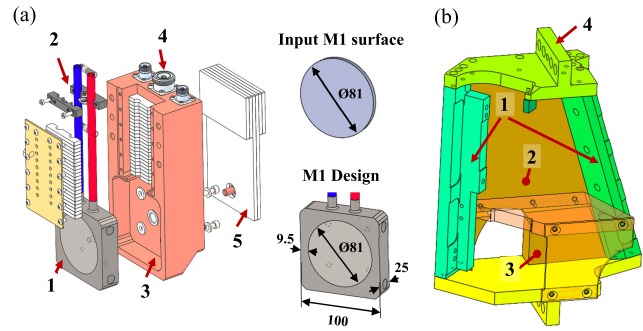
Detailed view of the 55.G6 FMU conceptual design. (a) M1 mirror assembly. (b) FMU housing.
